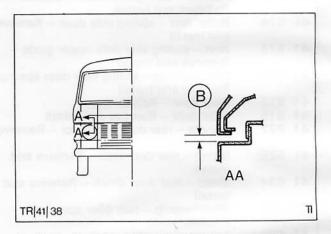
Hood setting – underside of hood to crossmember clearance B – 7,5±1,5 mm
